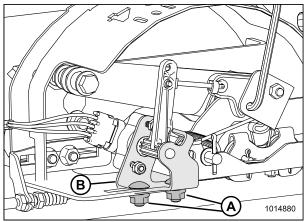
AHHC Sensor Assembly for Use with Lexion Combines
